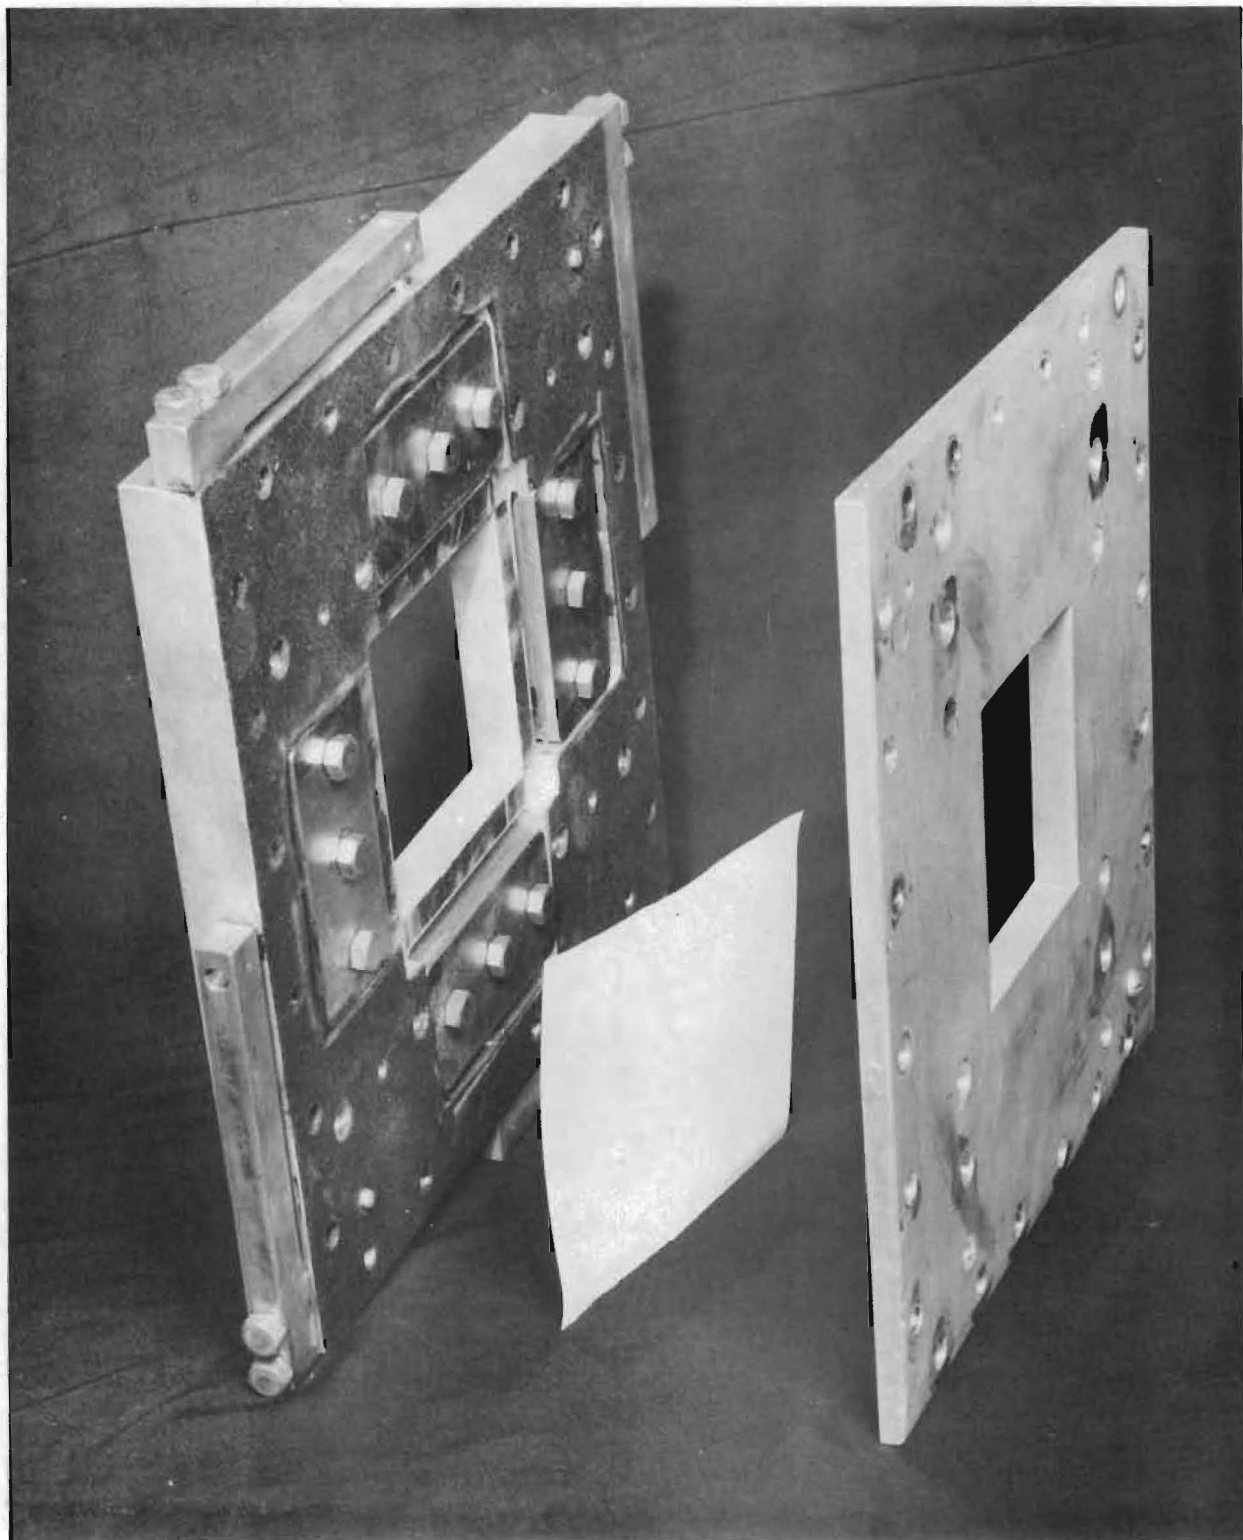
Exploded View of Biaxial Tension Sample Holder.
